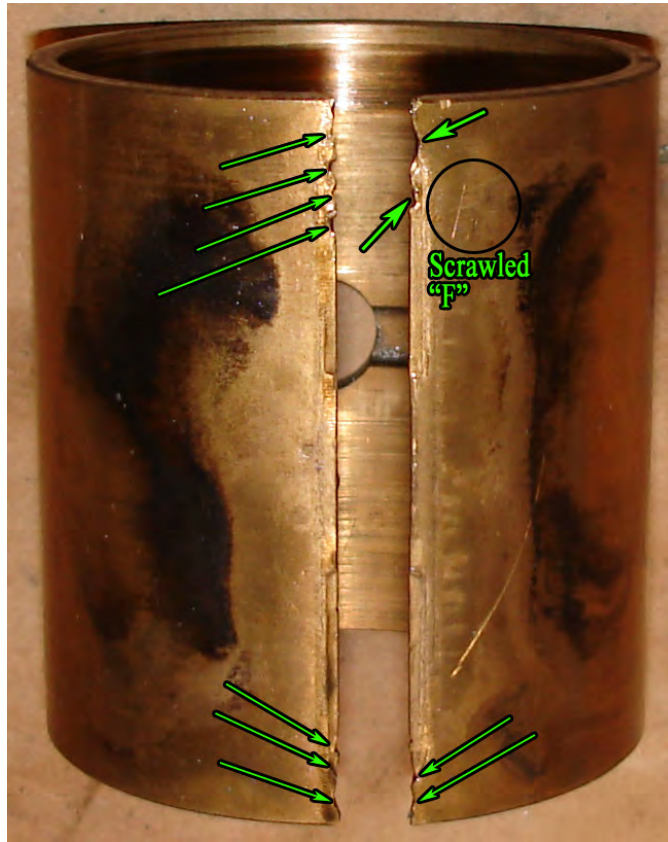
Front bearing showing where damage has occurred from the bearing cap being removed without first pulling the expander screws. The expander has been pulled straight through the bearing shell.
